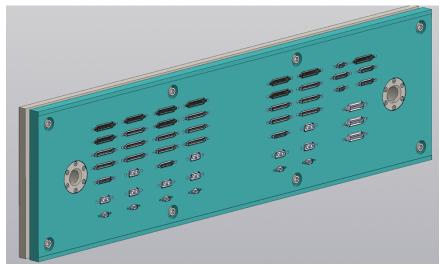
Plate with Mounted Connector Harness (with cables not shown)
